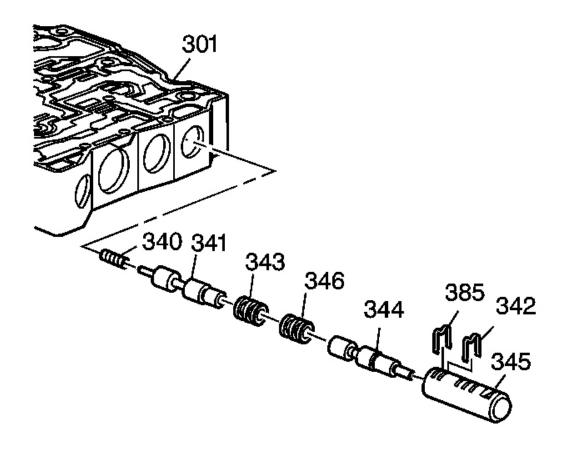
View Of 2-3 Accumulator Valve & 3-4 Accumulator Valve Components Courtesy of GENERAL MOTORS CORP.
